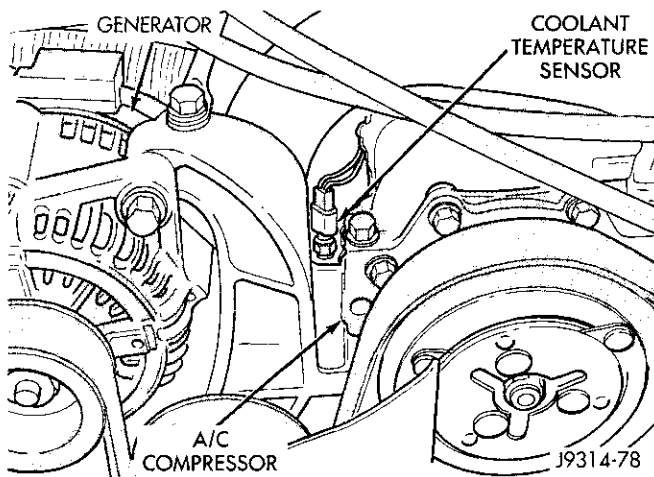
Engine Coolant Temperature Sensor—3.9L/5.2L/5.9L Engines
